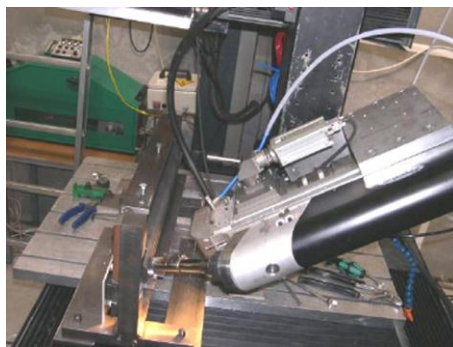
Set-up of hybrid-laser-MIG welding [67]
